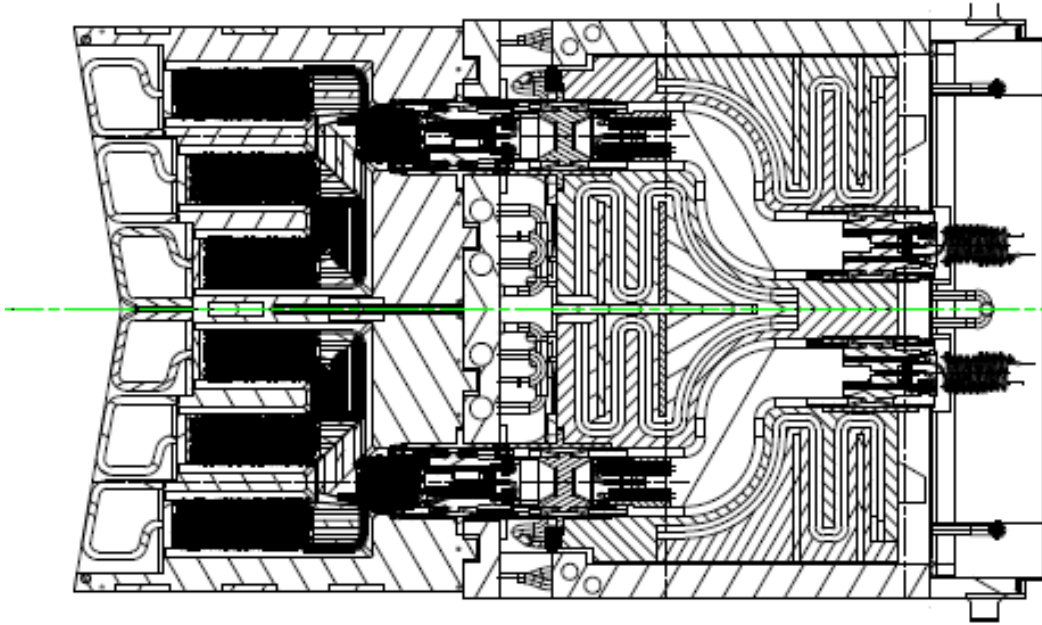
CAD Drawing of the ICRH v2 [89]
